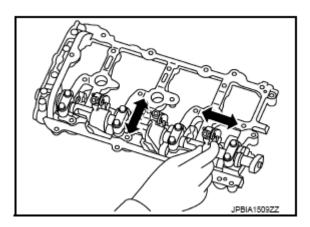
Moving Drive And Control Shaft Courtesy of NISSAN MOTOR CO., U.S.A.
